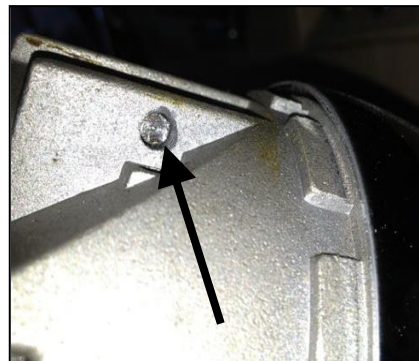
Tilt mechanism pivot lock pin falling out of ‘Helix’ upper housing
